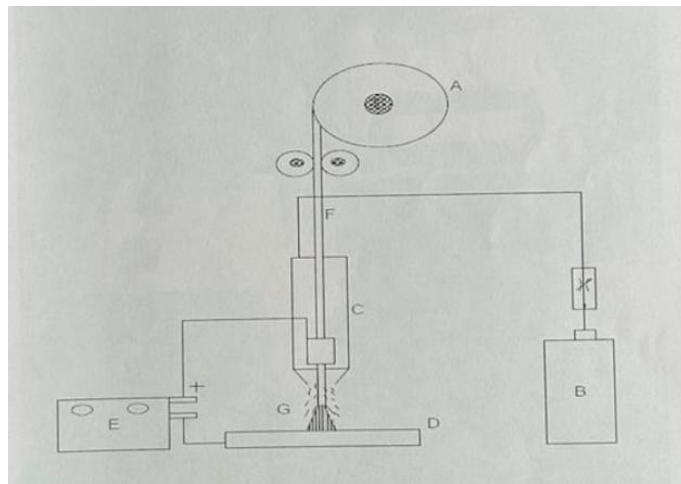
Schematic diagram of GMAW/MIG welding [3]
